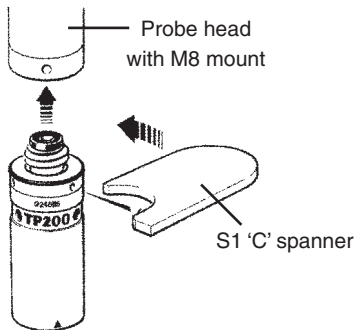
Fitting the TP200 probe sensor to a M8 probe head
